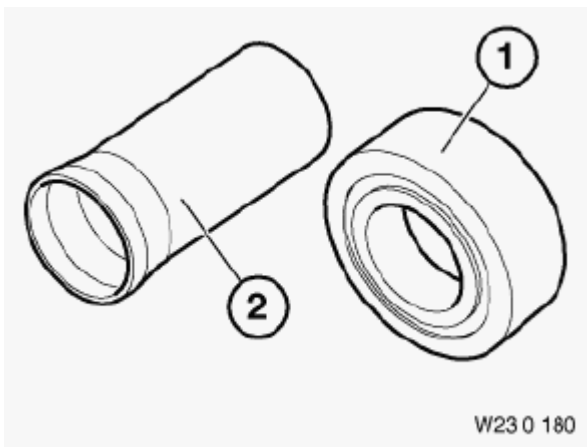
Impact Ring With Slip Sleeve (23 0 180)
